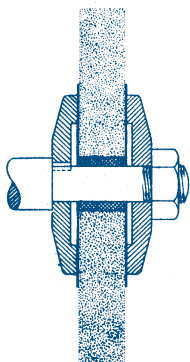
A straight-sided wheel with a small hole correctly mounted.
